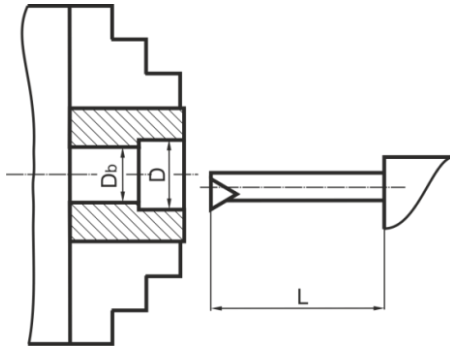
Experimental scheme (D_b – diameter of the workpiece; D – diameter of the machine part).
